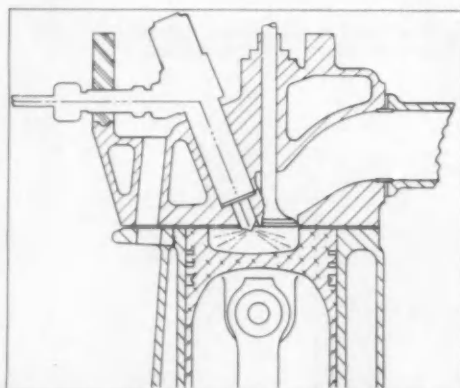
Open chamber configuration and injector location of the 242 cu in. displacement diesel engine used in the Ford 6000 tractor.
